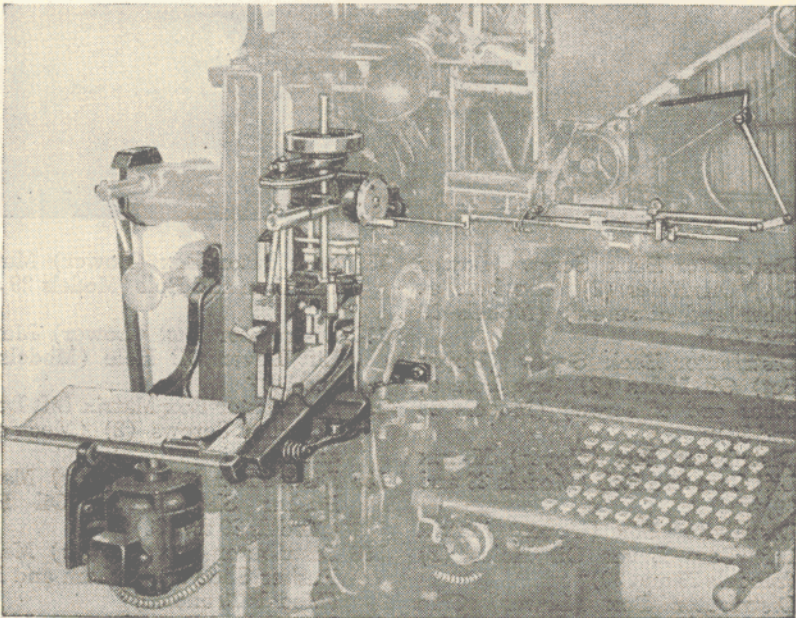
View of Mohr Lino-Saw installed on Linotype.
